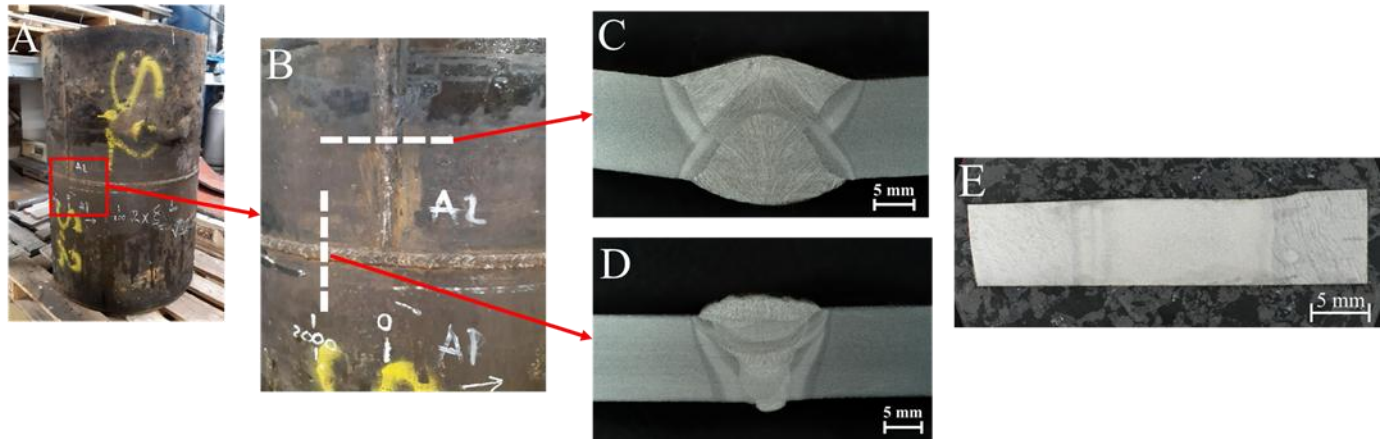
(a) Pipe studied in this thesis; (b) enlargement of the two weld beads; macrograph of the longitudinal weld (c), girth weld front view (d), (e) girth top view.
